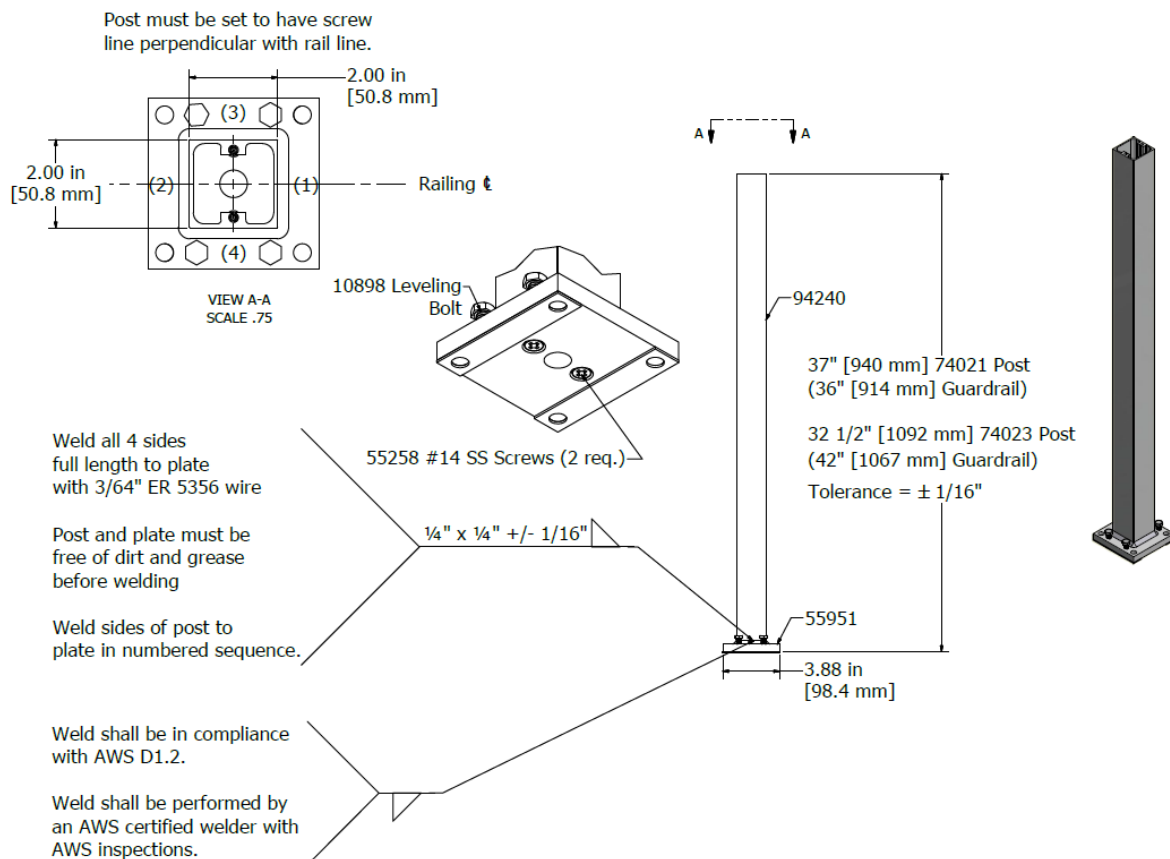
2" SQUARE ALUMINUM SUPPORT POST ASSEMBLY – SURFACE MOUNT
